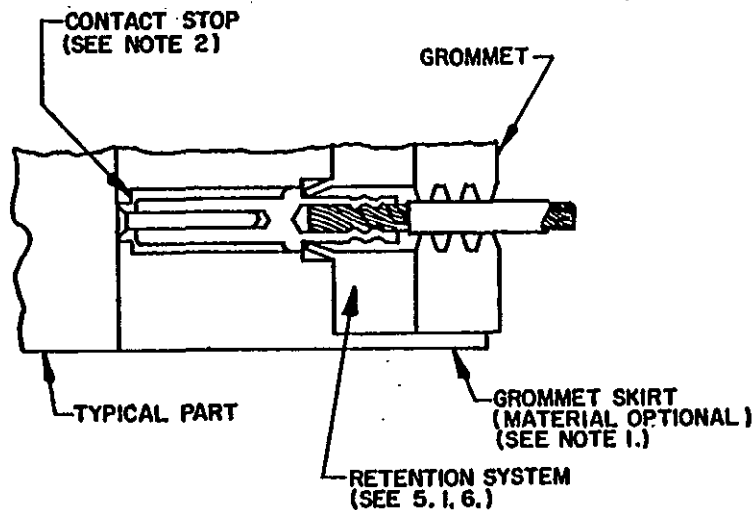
MIL-C-39029/22 or MS27491-12 socket contact.
